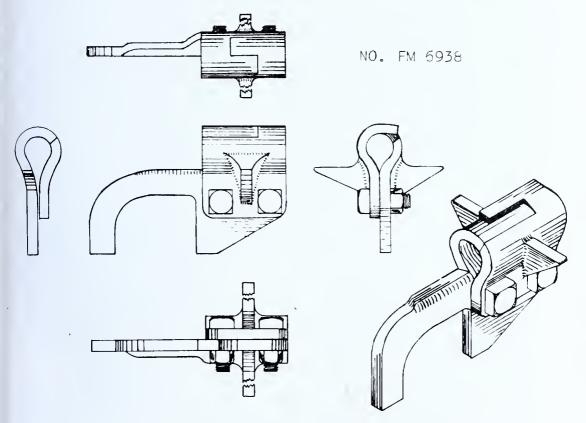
No. 3 and No. 4 Soot-Blower Bearing
